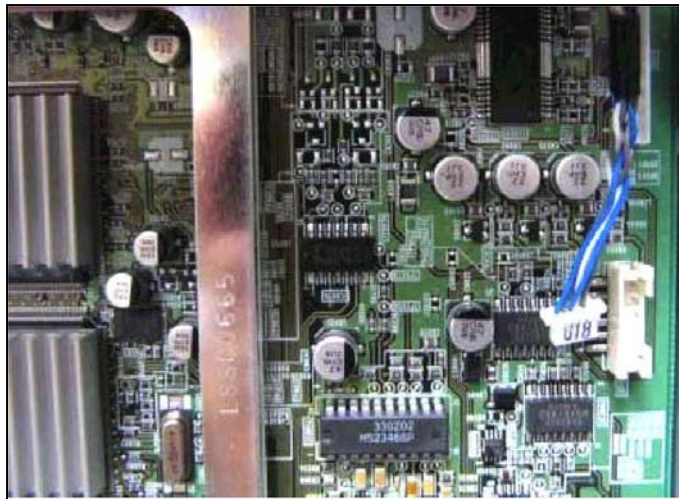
Original G18 wire harness and the incompatible DG board with the larger connector DG18.
